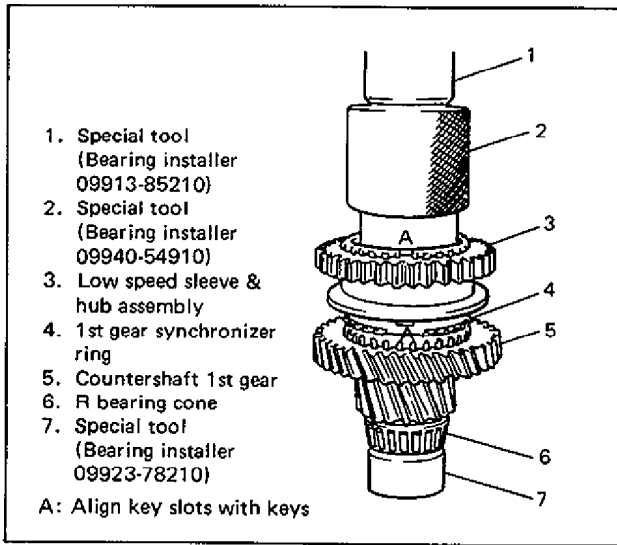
A-57 Press-fitting Low Speed Sleeve & Hub
